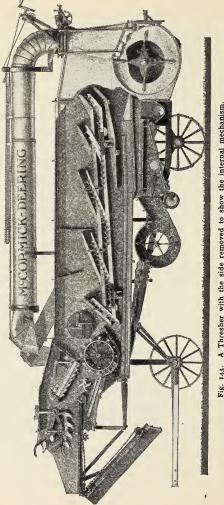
A Thresher with the side removed to show the internal mechanism. (Courtesy of McCormick-Deering.)
